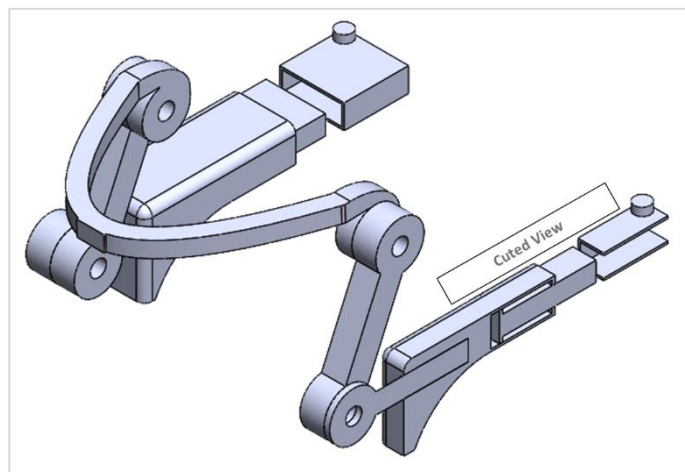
Isometric View of the Assembly with a Cut View of the New Pieces
